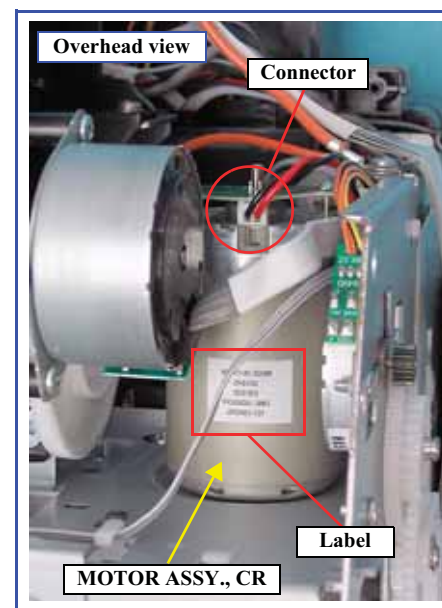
Removing the screws from the MOTOR ASSY., CR
